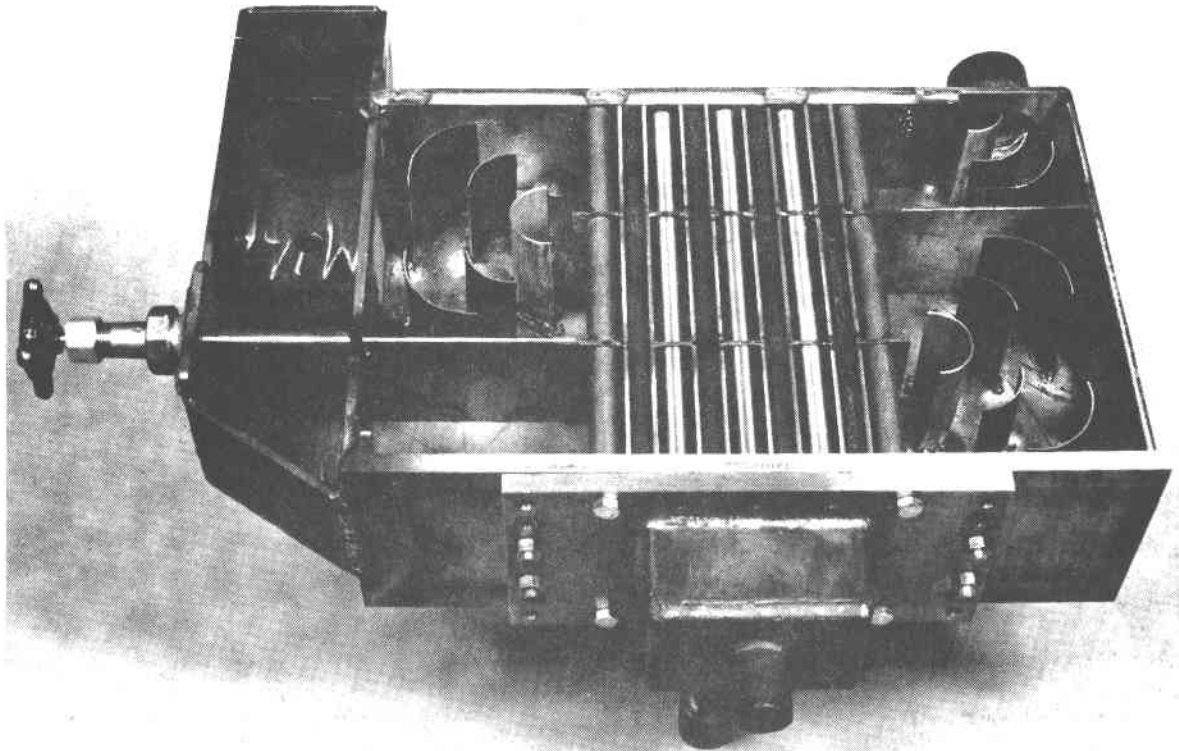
Heat Exchanger Shell with Tube Assembly Installed
